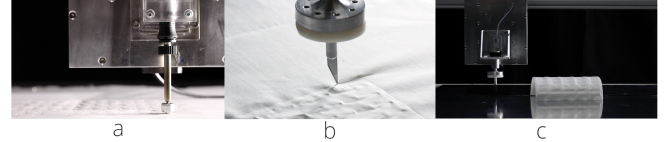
The robotic sealing steps are: (a) Sealing; (b) Cutting; (c) Inflating.
